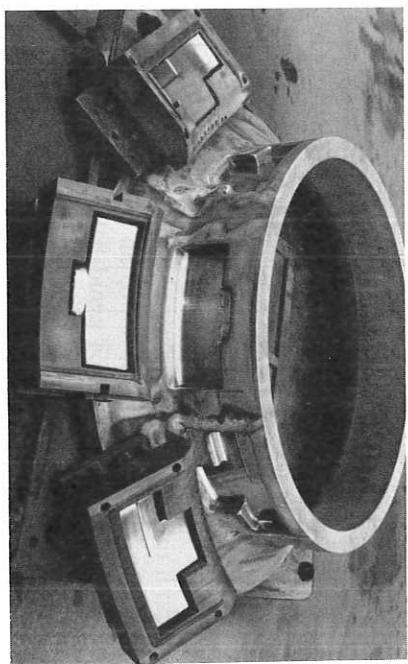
Complexly shaped component and ECM tools used to produce it.
